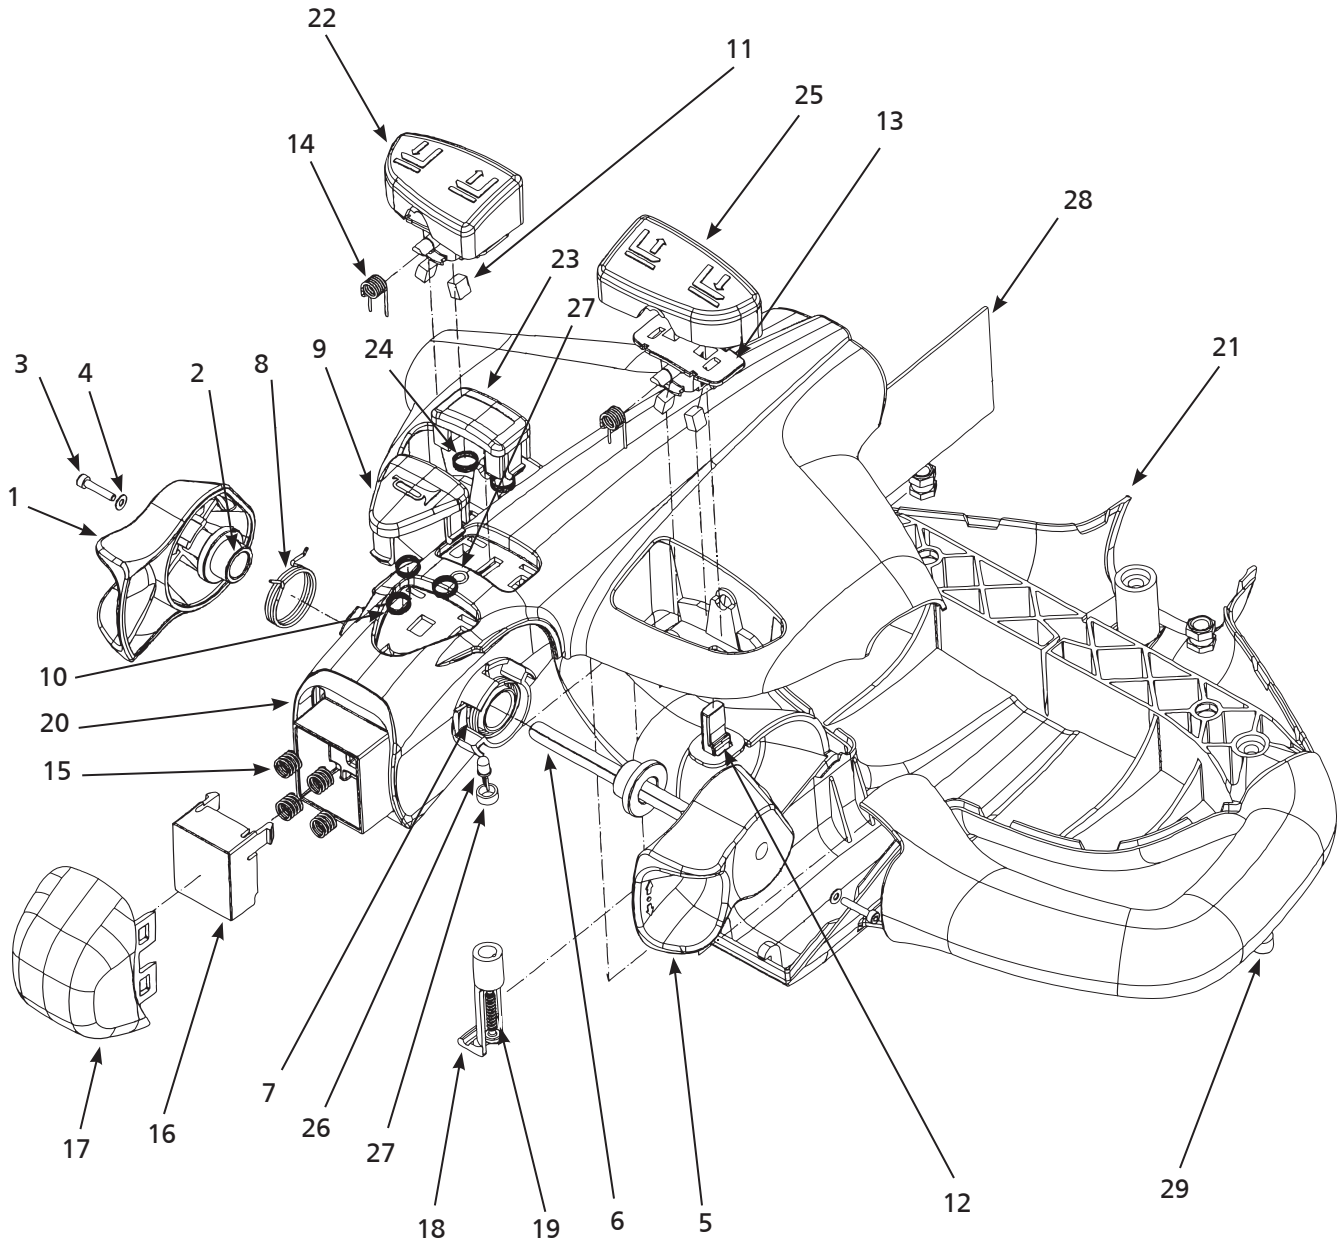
Repair Parts Illustration for Pallet Truck Control Handle
